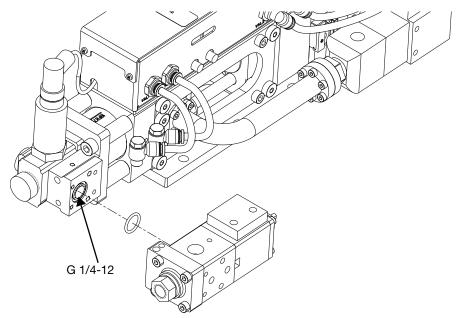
Mounting Hole Dimensions for Remote Installed Dispense Valve
